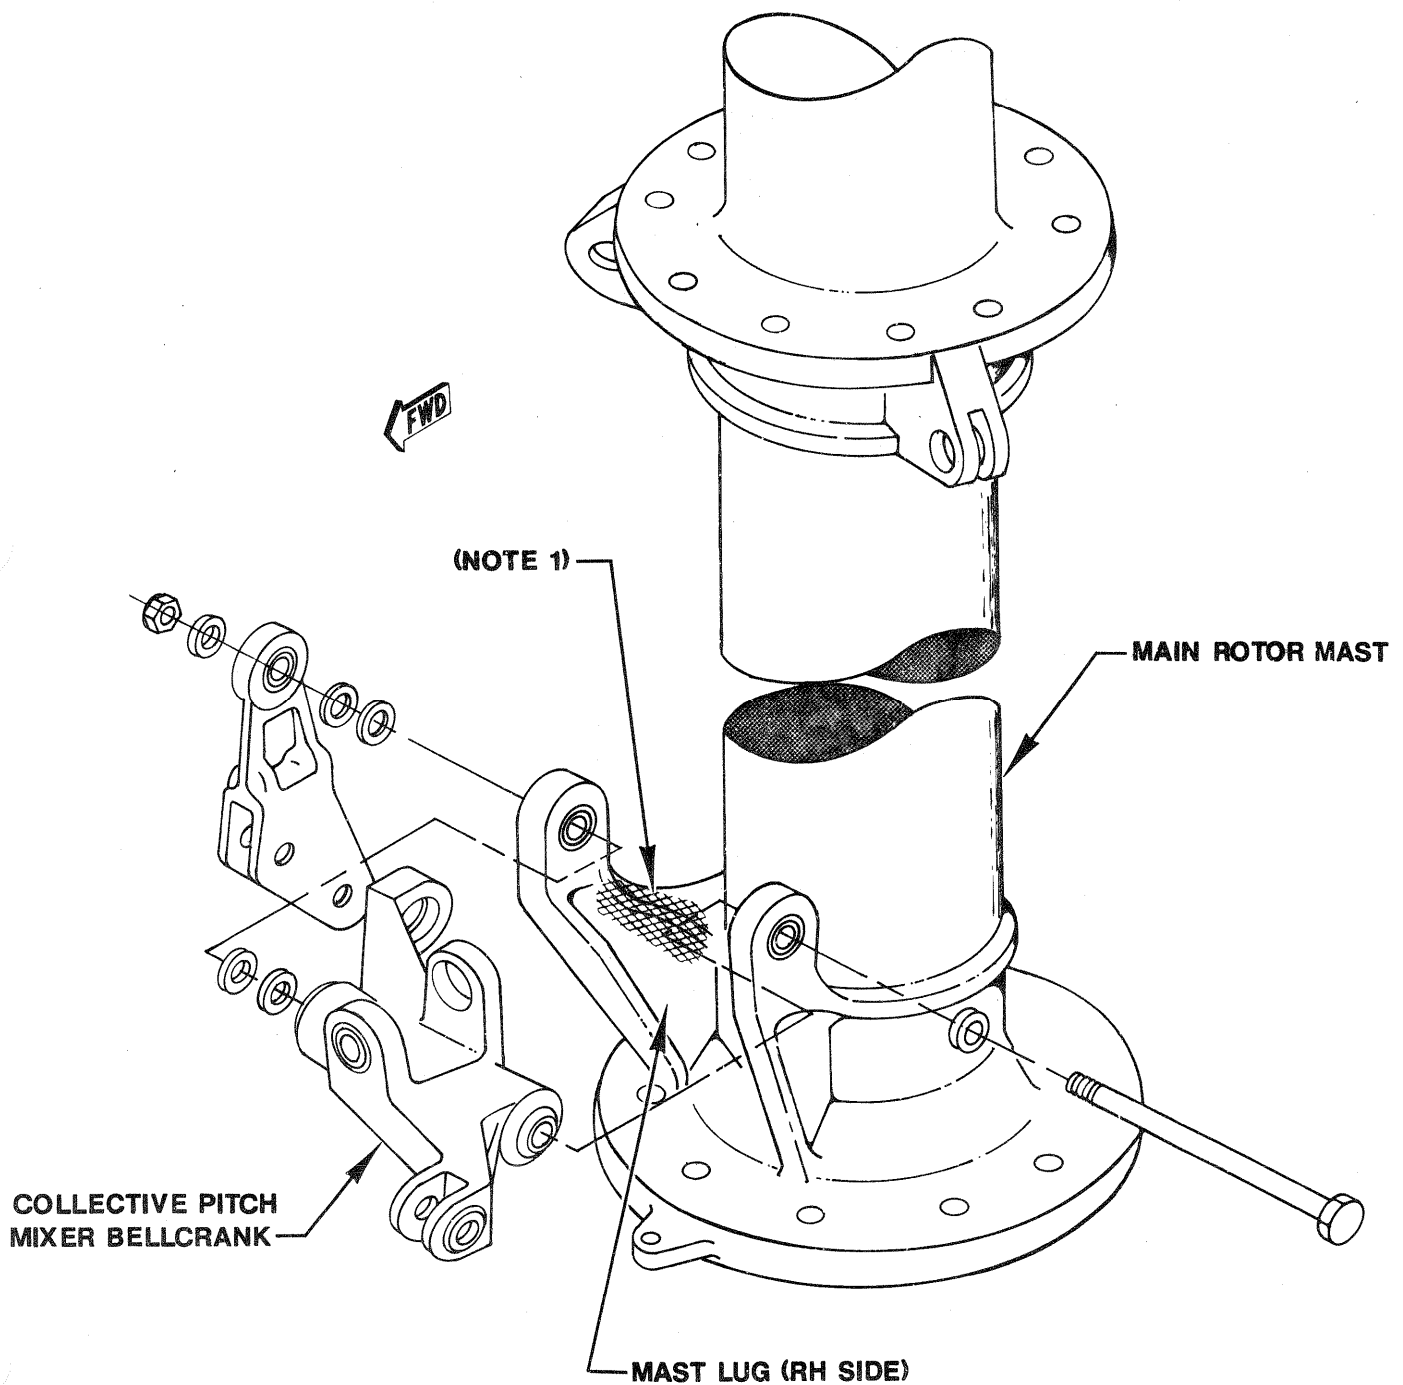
DYE-PENETRANT INSPECTION OF MAST LUG
